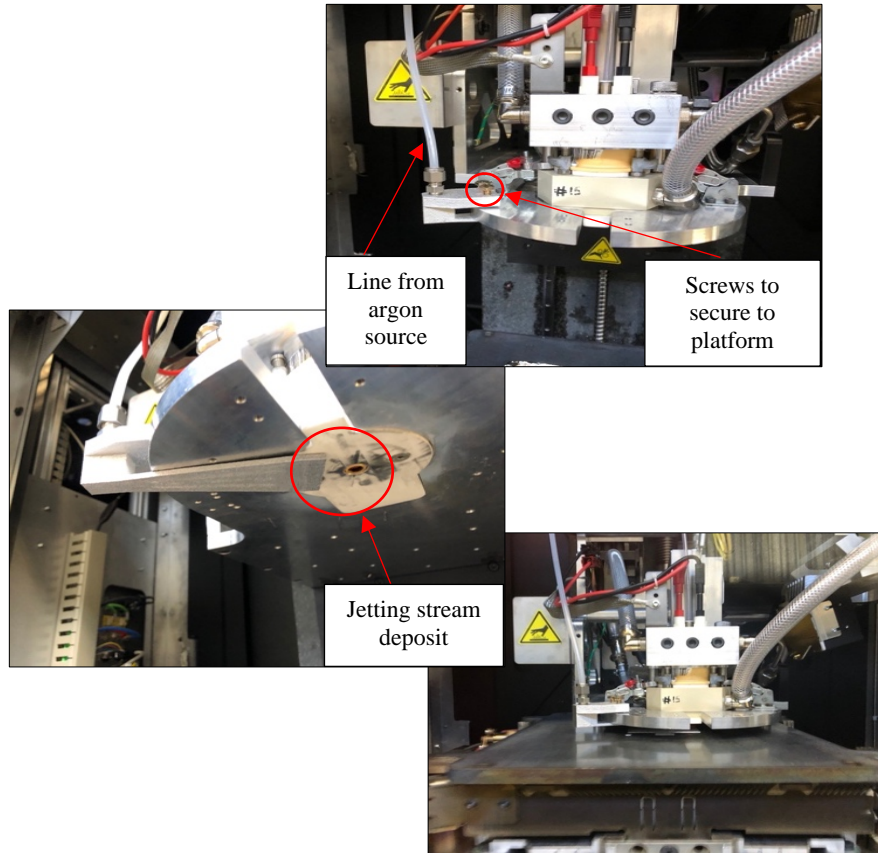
Argon Injector installed onto XEROX ElemX Printer Printhead
